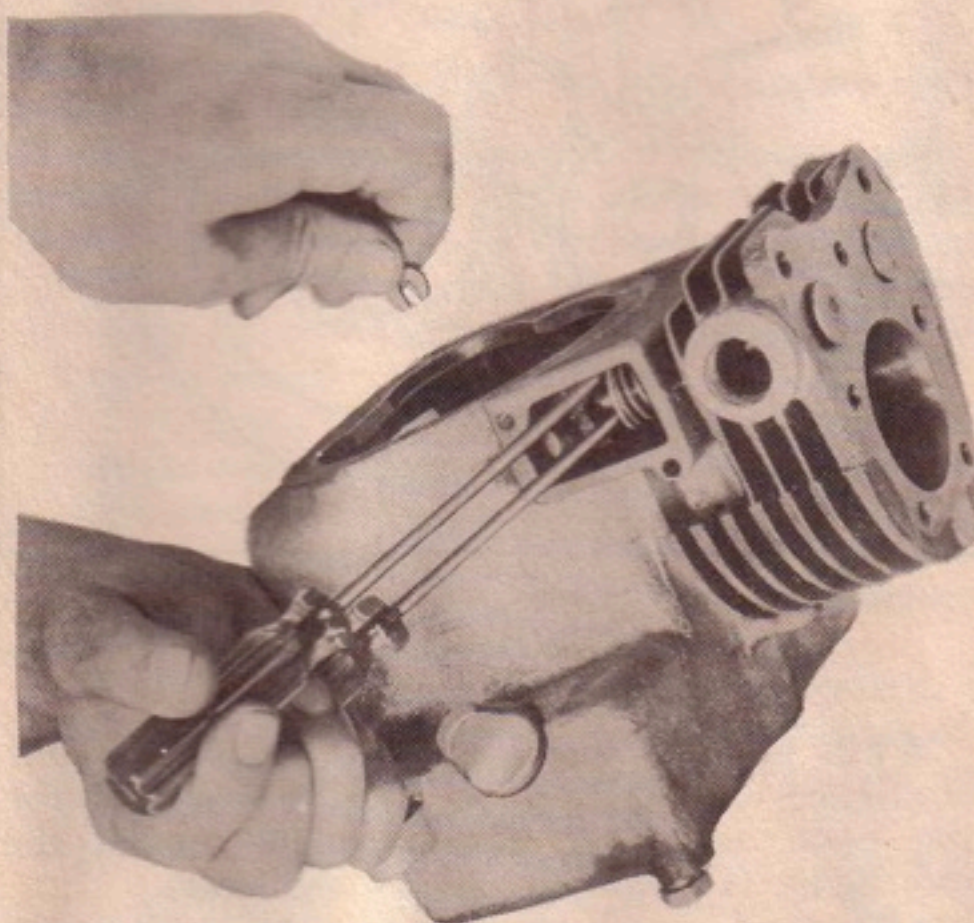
Valve Spring Assembly — 300 Series — After installing the valve, valve spring, and valve spring seat, the "keeper" (No. 3291) is easily assembled when the valve spring is held compressed in the manner shown
